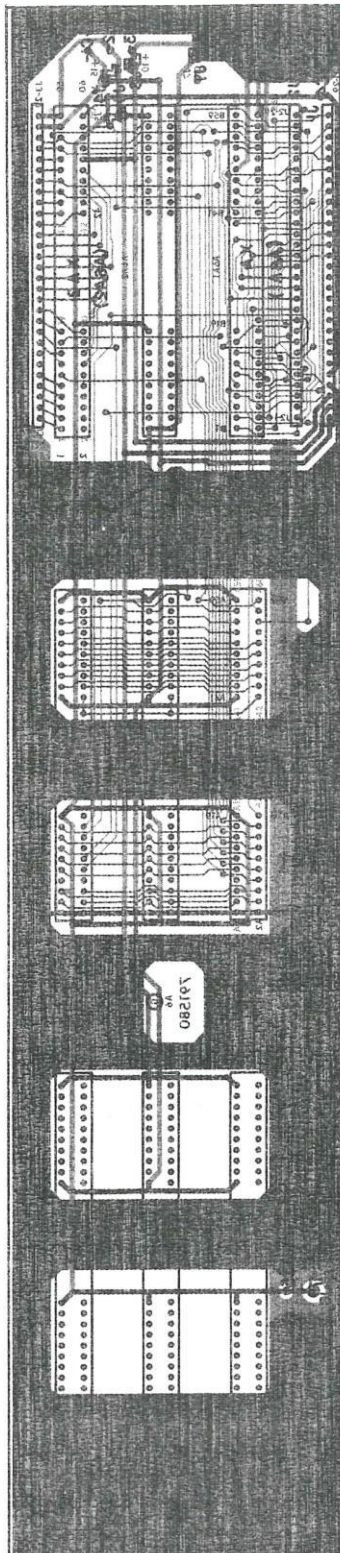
Tracks in the later versions of the A6 motherboard PCB (bottom side)
